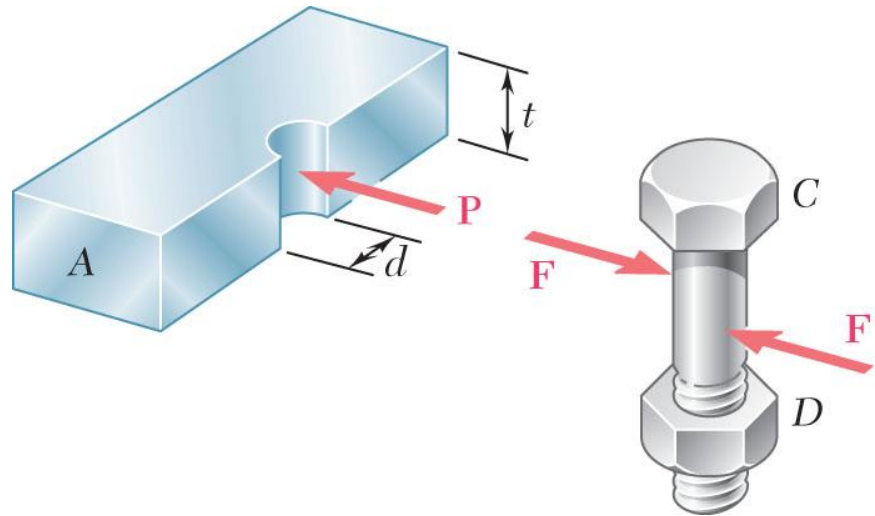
Equal and opposite forces between plate and bolt, exerted over bearing surfaces.
